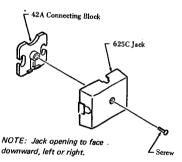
Conversion of 42A Connecting Block Using 625C Jack
